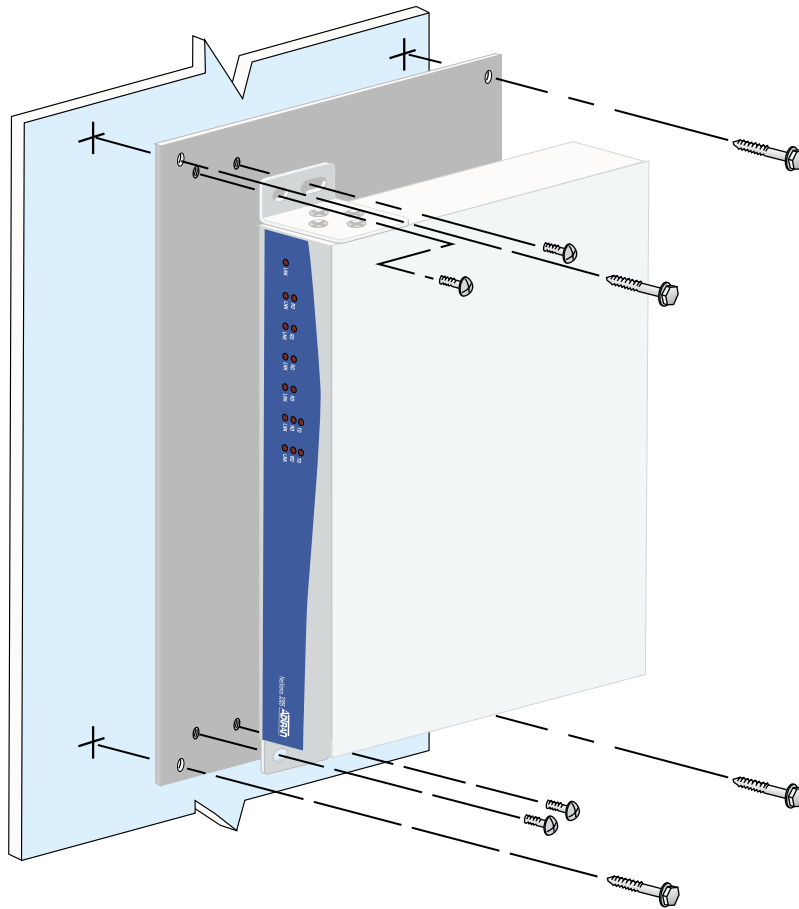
Wallmounting the NetVanta 3205/NetVanta 3305
